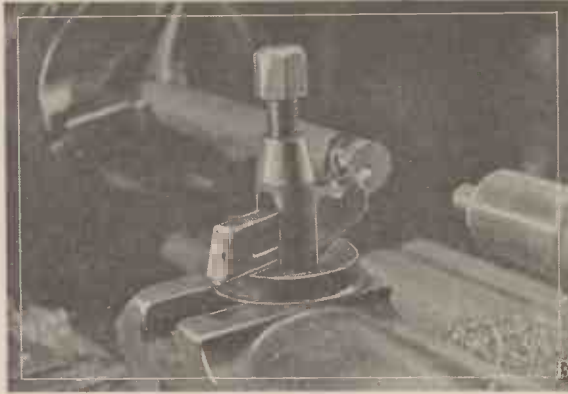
(left).—Setting the tool for centre height, and Fig. 6 (right) showing a cut being taken which is cleaning up the bar with a reduction of only .004 in. in diameter.
